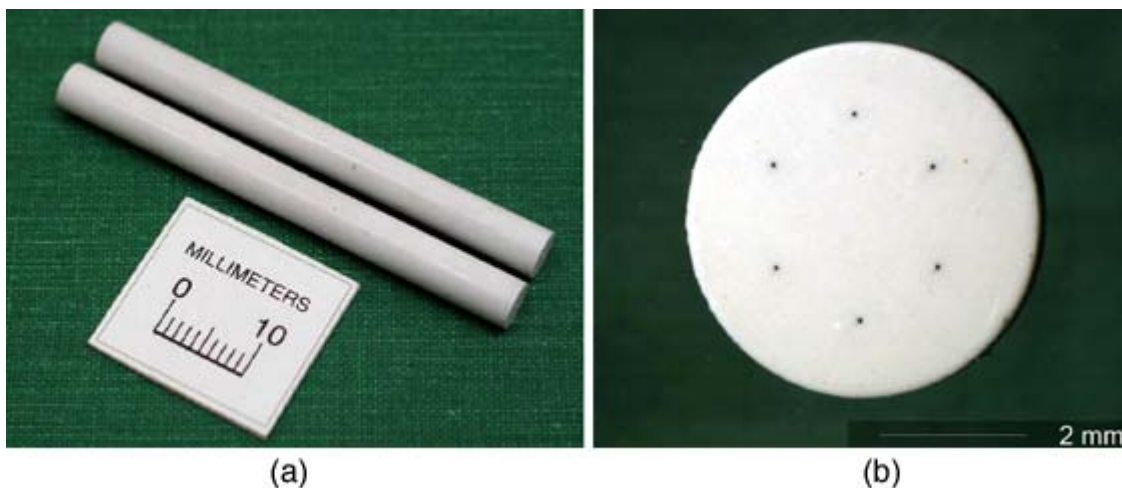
(a) Coextruded alumina rods 50 mm × 5 mm containing a hexagonal array of hole-formers. (b) Cross-section of a coextruded alumina rod showing the hole-forming array.
